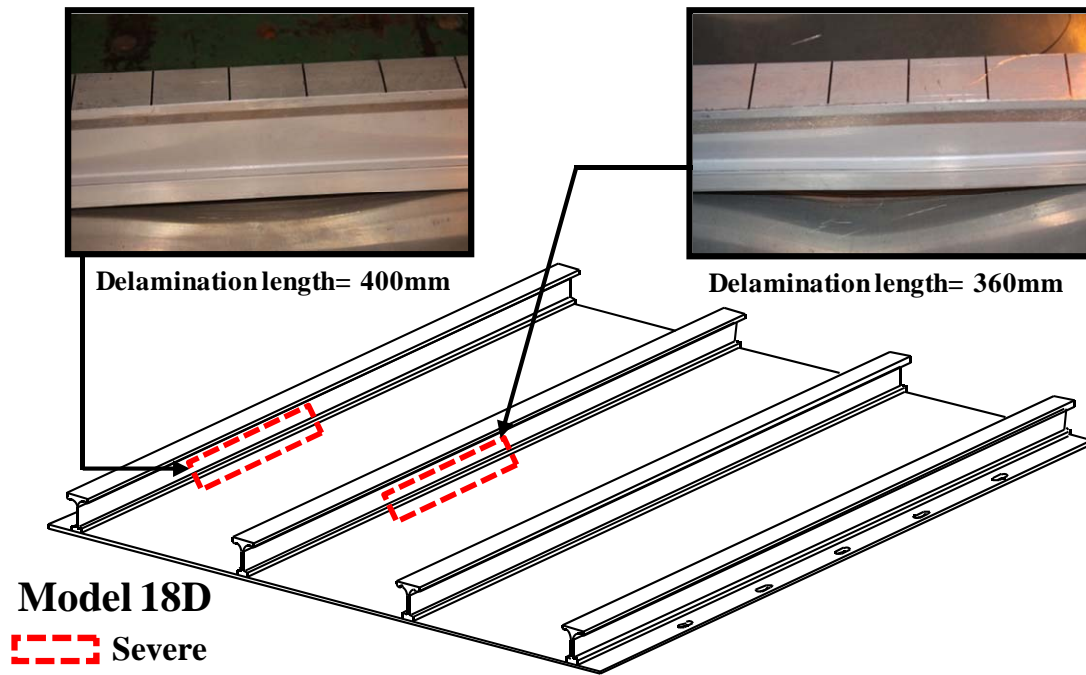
(b) Photo of the delamination failure in test structure 18D, taken at the end of testing
